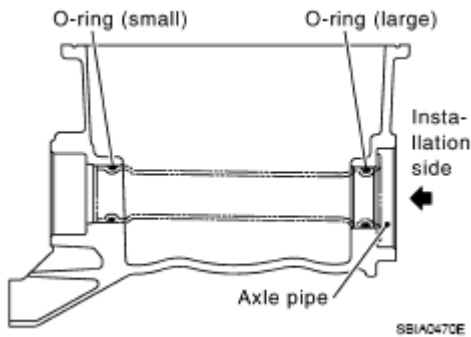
Identifying O-Ring Groove Of Axle Pipe, O-Ring, And O-Ring Joint Of Oil Pan
